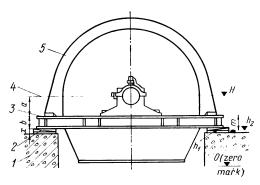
Sketch showing the drive motor and foundation with basic fixing dimensions
